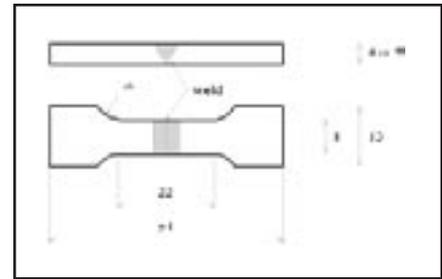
Dimensions of specimens used for tensile tests (mm).
